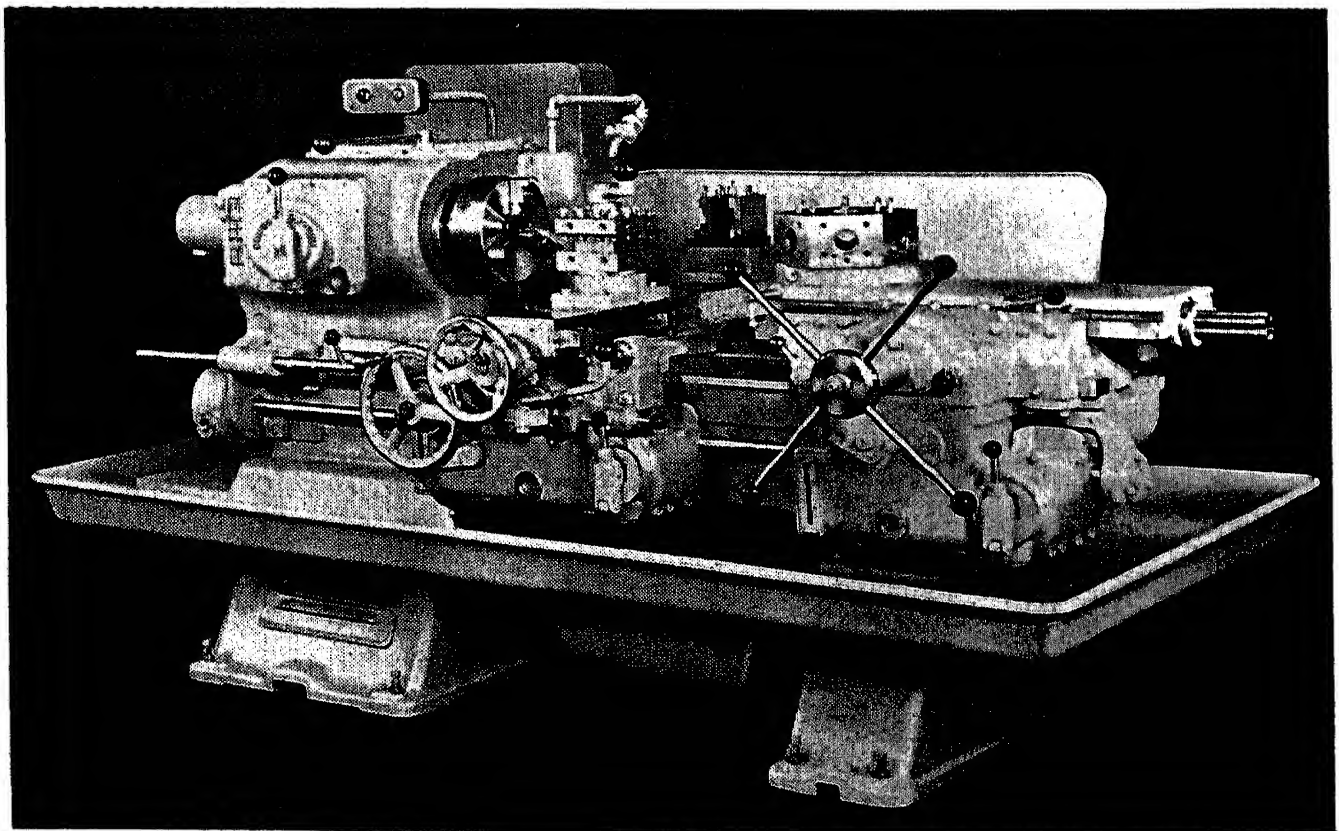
A No. 5 ram-type turret lathe. (Courtesy Jones and Lamson Machine Co.)
